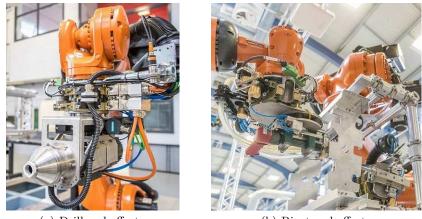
Reconfigurable assembly cell of the Future Automated Aircraft Assembly Demonstrator developed by the University of Nottingham
